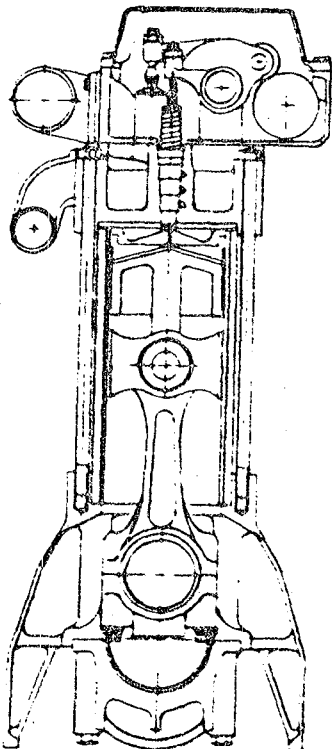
Sketch of a four-stroke cross-head diesel engine
